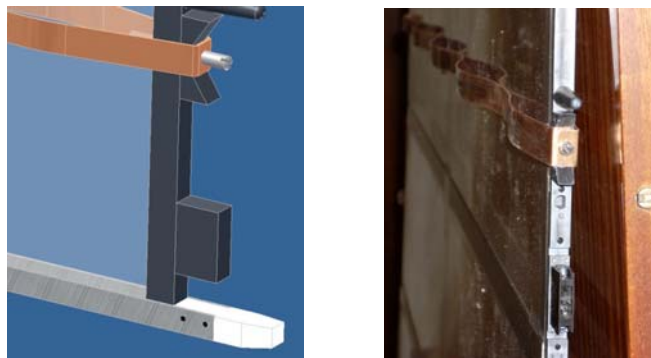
Springs fixed on pins tightened in the existing M6 holes
